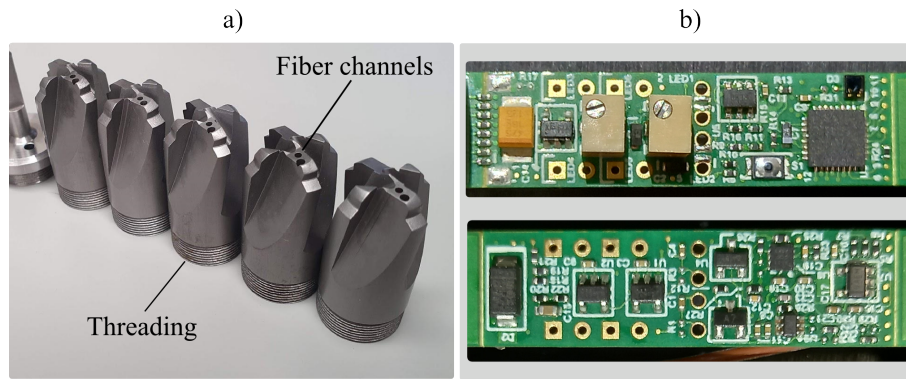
a) Custom machined threaded cranial perforators. b) LED control and data acquisition PCB (top and bottom).
